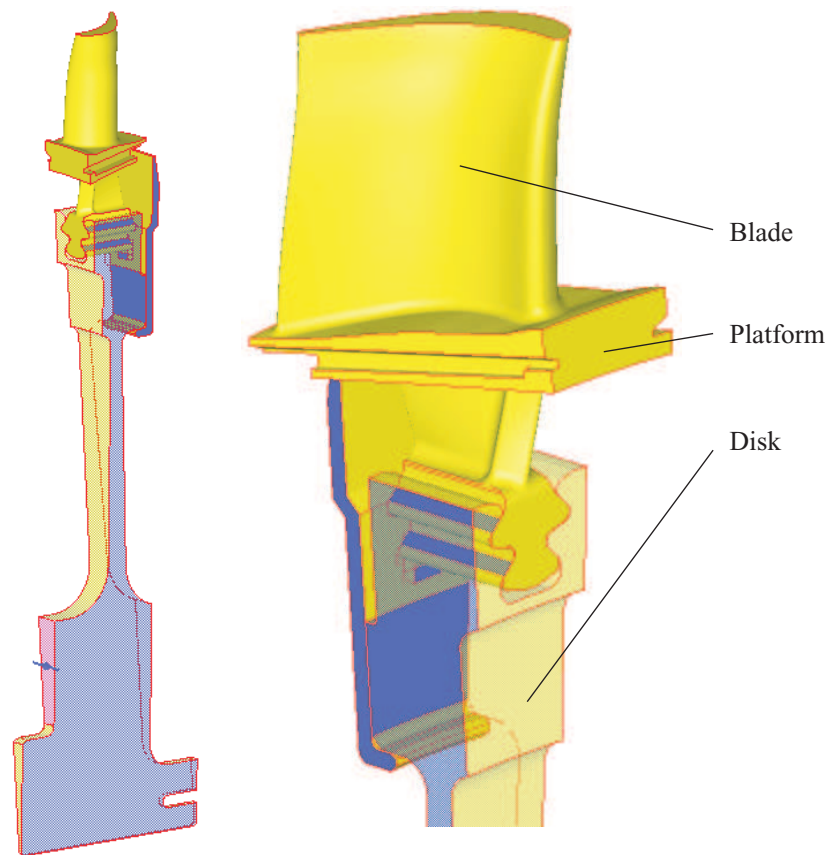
Model of a single sector of a bladed disk assembly. The sector is comprised of the blade and a section of the disk. The entire bladed disk can be deduced by successive rotations of this sector due to its properties of cyclic symmetry. Friction dampers are usually located in specially designed cavities or grooves underneath the platforms. (Model provided by SNECMA.)
